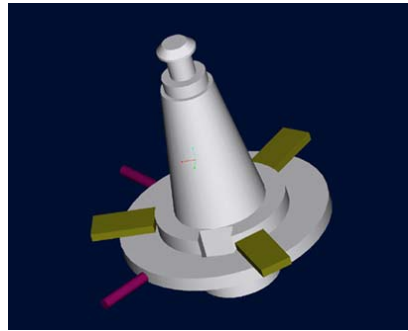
Target disk mounted on the tool holder with rectangular and cylindrical capacitance gauges targeting at it (Pro-E)
